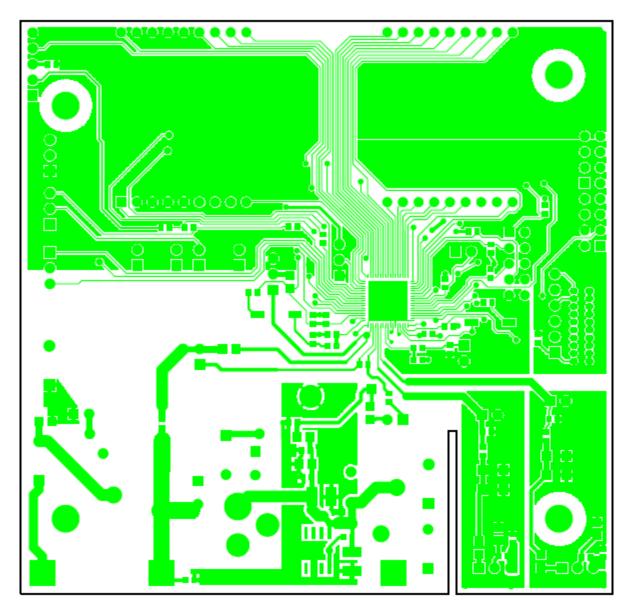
71M6531N12A2 Demo Board: Top Copper Layer
